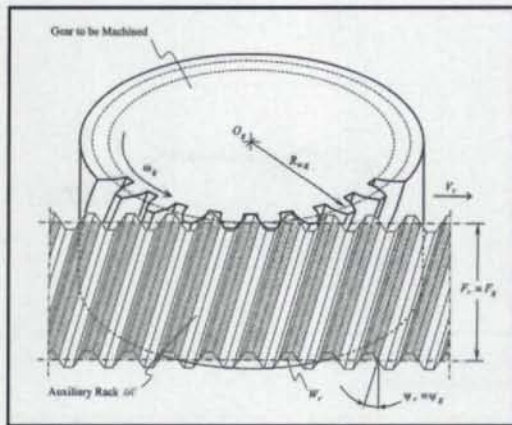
The auxiliary phantom rack R as an enveloping surface to consecutive positions of the tooth surface of the gear to be machined.
